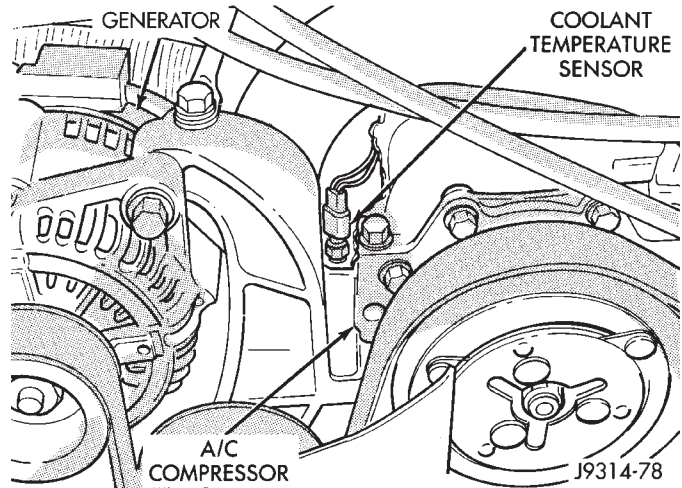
Engine Coolant Temperature Sensor—5.2L/5.9L Engines
